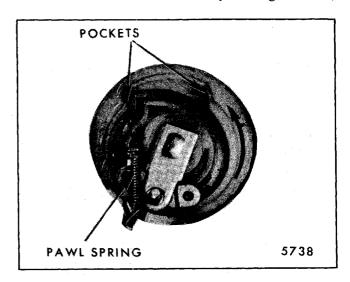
Drive and Lock Pawl Guide Pin Pockets
